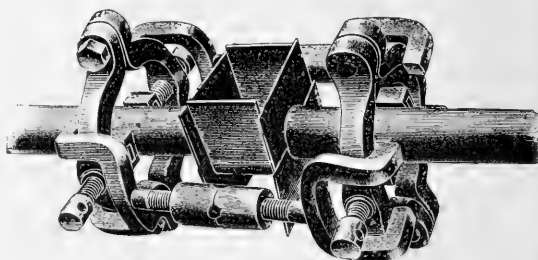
Tubes clamped together with a casing of thin iron round the junction to be welded.
